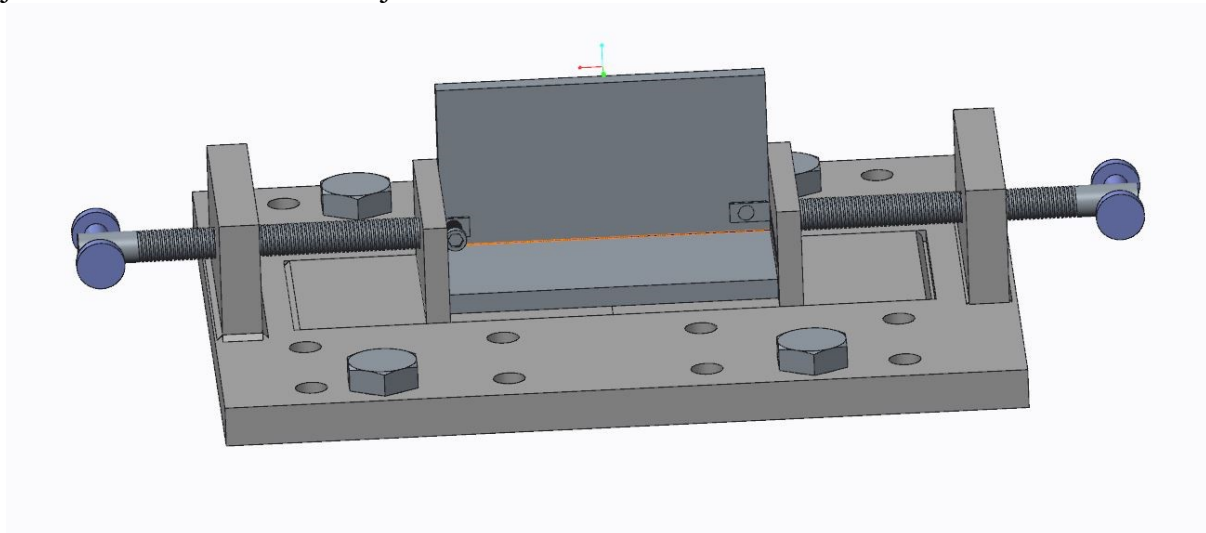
Fixture setup for welding of T –joint in in the corner.
